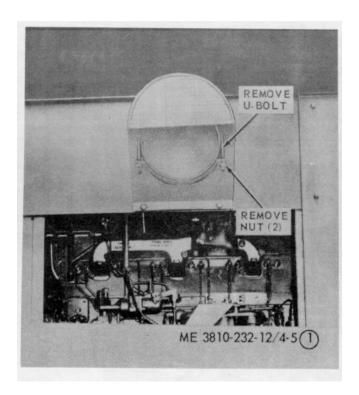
Crane engine exhaust assembly, intake and exhaust manifolds, removal and installation.
